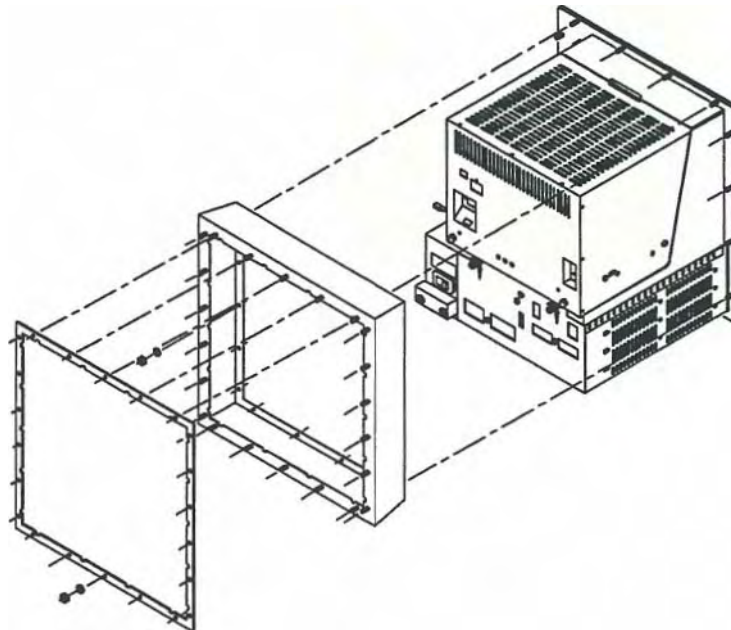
PanelMate Series 4000 (Model 4500) Mounting Collar Assembly
